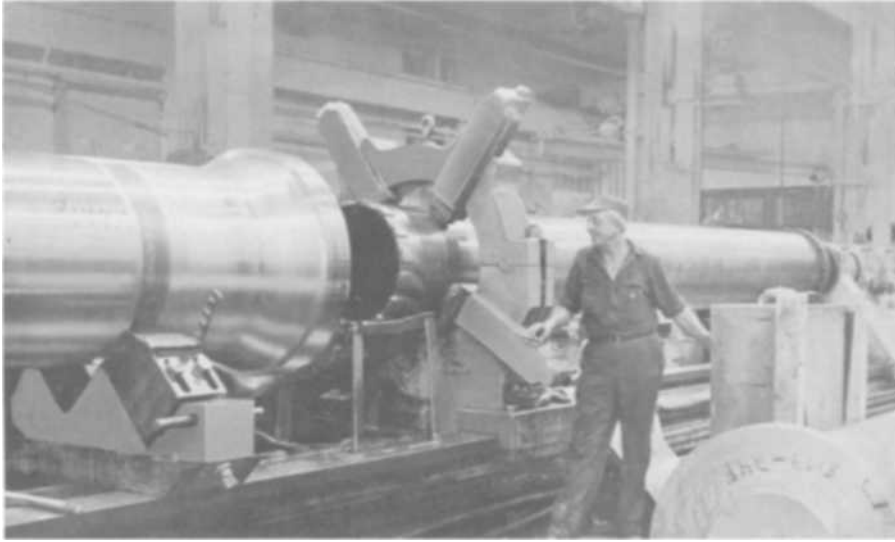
Trepanning the bore of a large forged steel centrifugal casting mold. The core bar is typically used as starting stock for other applications.
